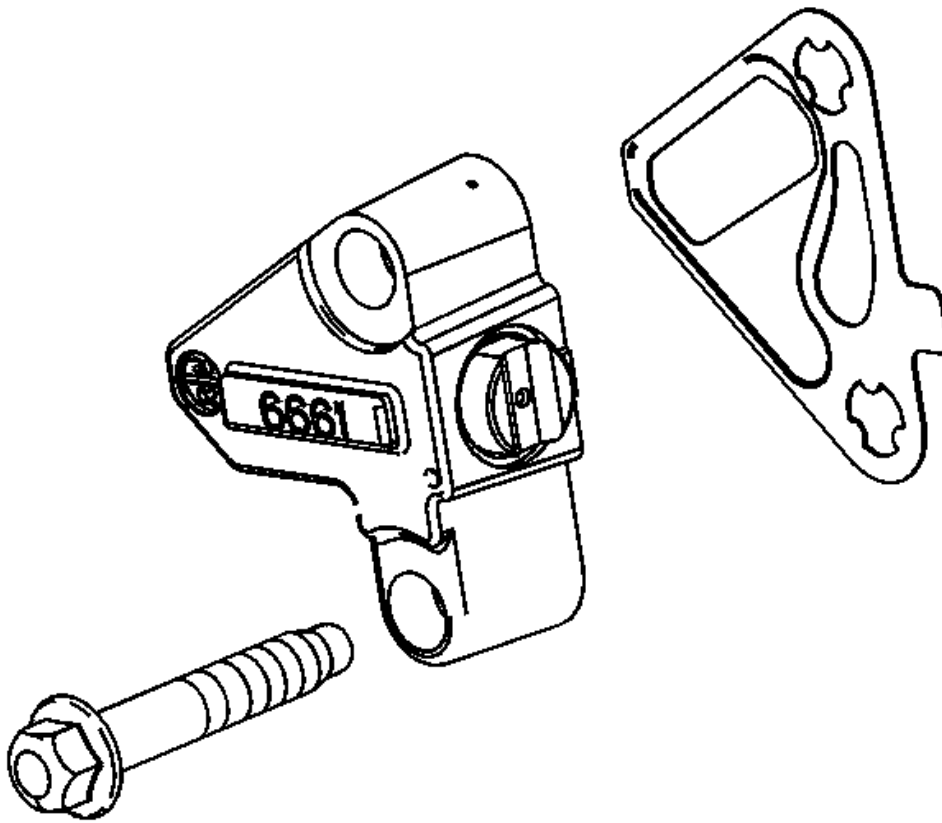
Inserting EN 46112 Into Access Hole In Side Of Left Secondary Camshaft Drive Chain Tensioner Body
